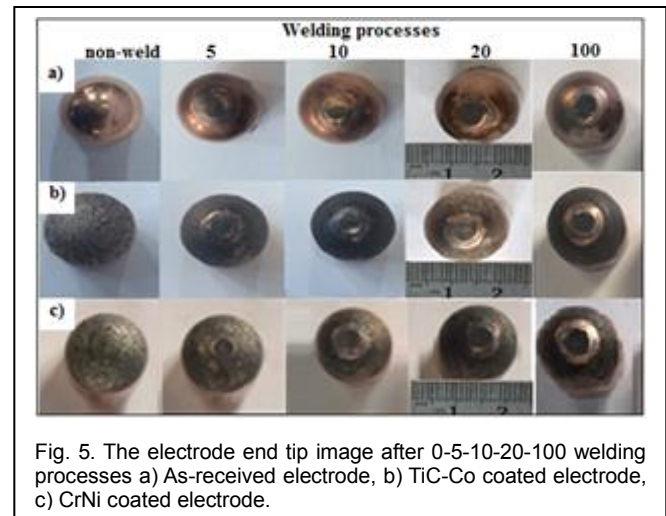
The electrode end tip image after 0-5-10-20-100 welding processes a) As-received electrode, b) TiC-Co coated electrode, c) CrNi coated electrode.
